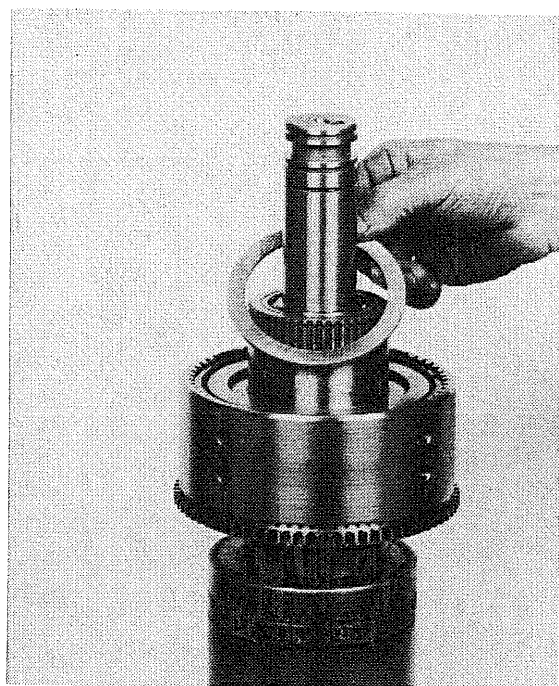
Disassembly of the PFR Clutch (4 of 4)
